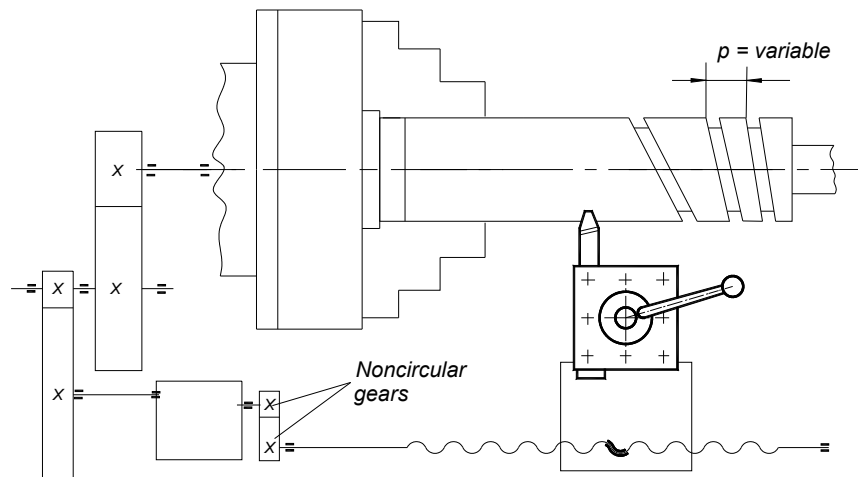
Kinematic chain corresponding to obtaining a threaded surface with variable pitch on a lathe by using noncircular gears.
